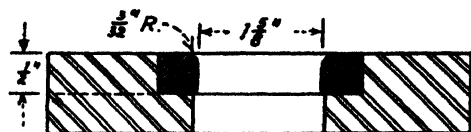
Used for drawing a cup from 0.050-in.-thick stainless steel, this carbide draw ring finished an order for 15,000 parts without requiring any maintenance. A tool-steel die for the same part lasted for only 800 pieces before wearing beyond allowable limits, while a nickel-iron die made only 2,000 pieces before failure.
